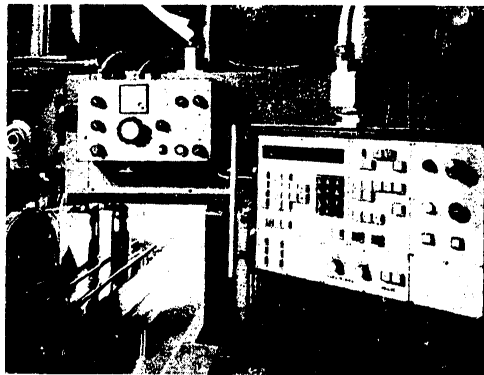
Control panel of the Philips 6600 system together with a Maho milling machine
